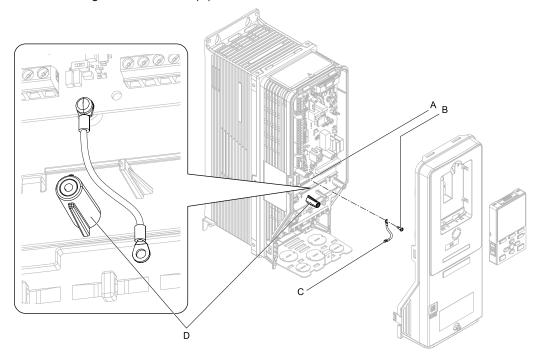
Remove the Screw from the Drive Grounding Terminal
